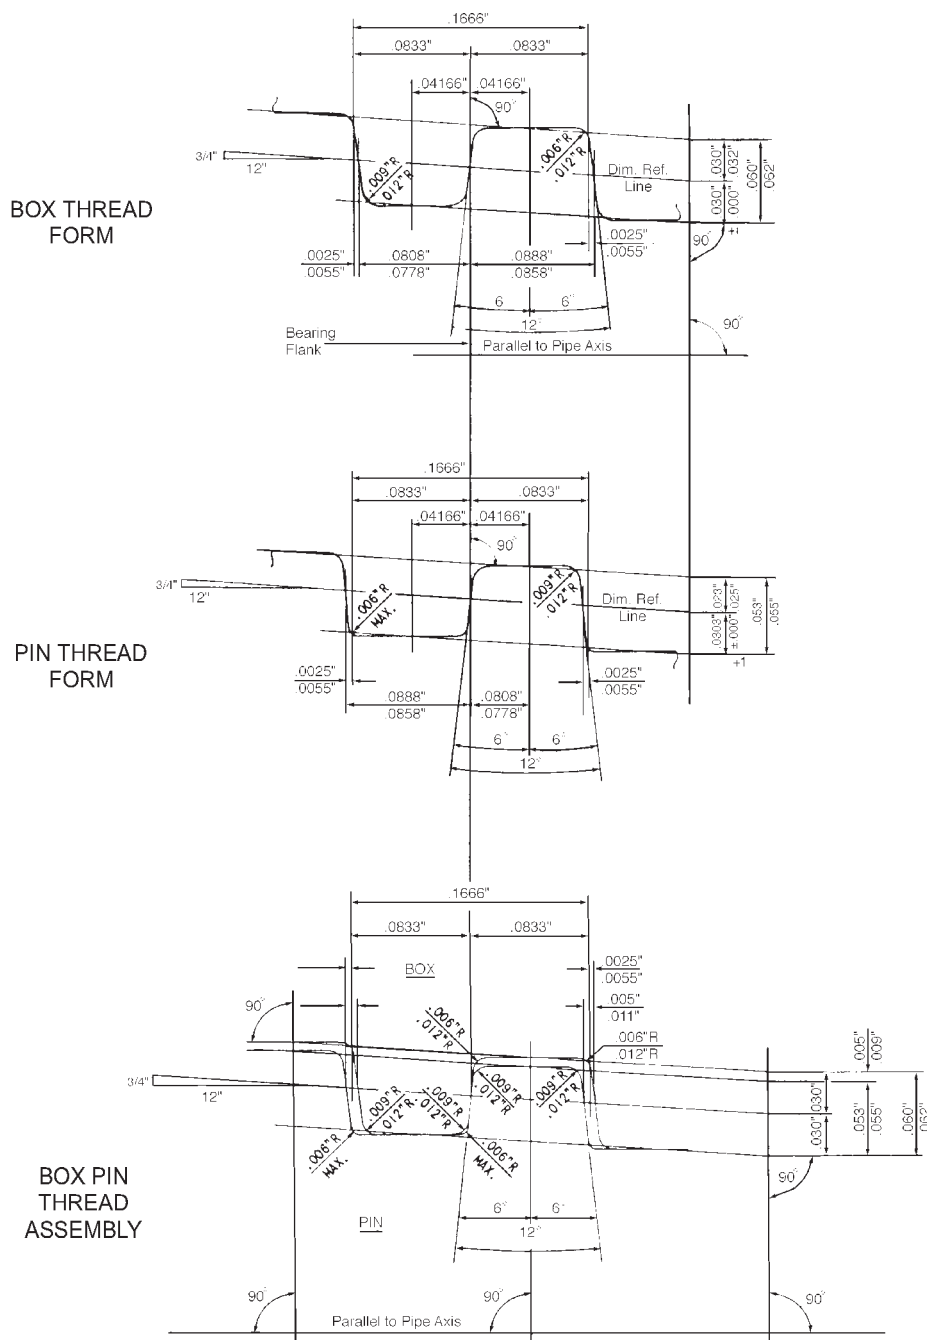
Product Thread Form—Sizes 5 through 7 5/8
